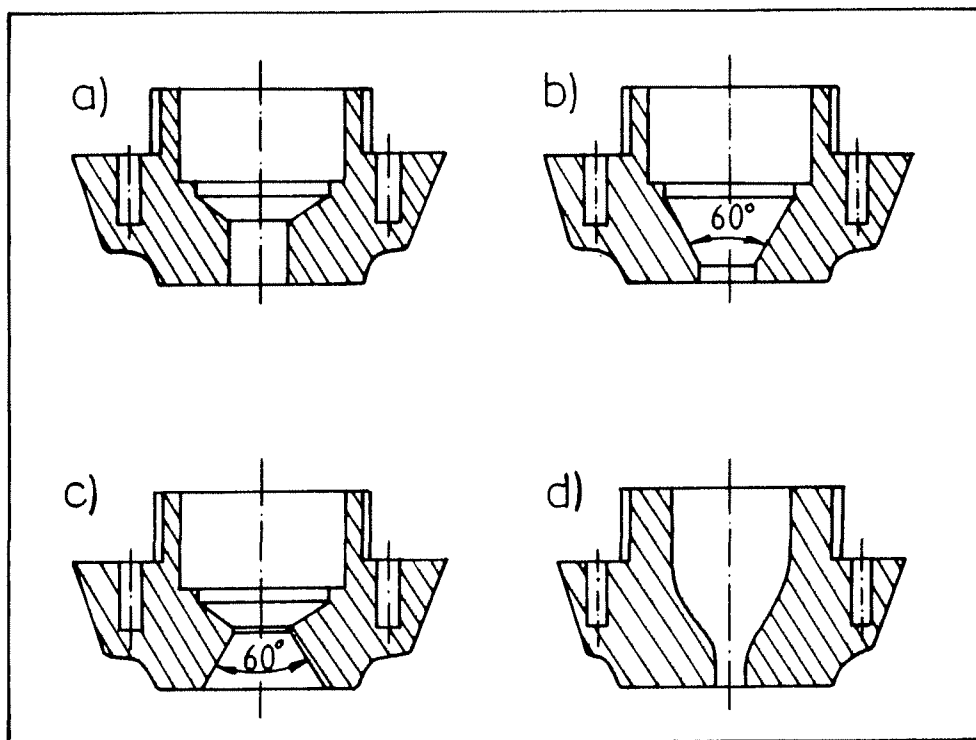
The nozzle types performed in nozzle experiments. a) straight cylindrical, b) 60° restrictive, c) 60° expanding and d) cutting nozzle.
